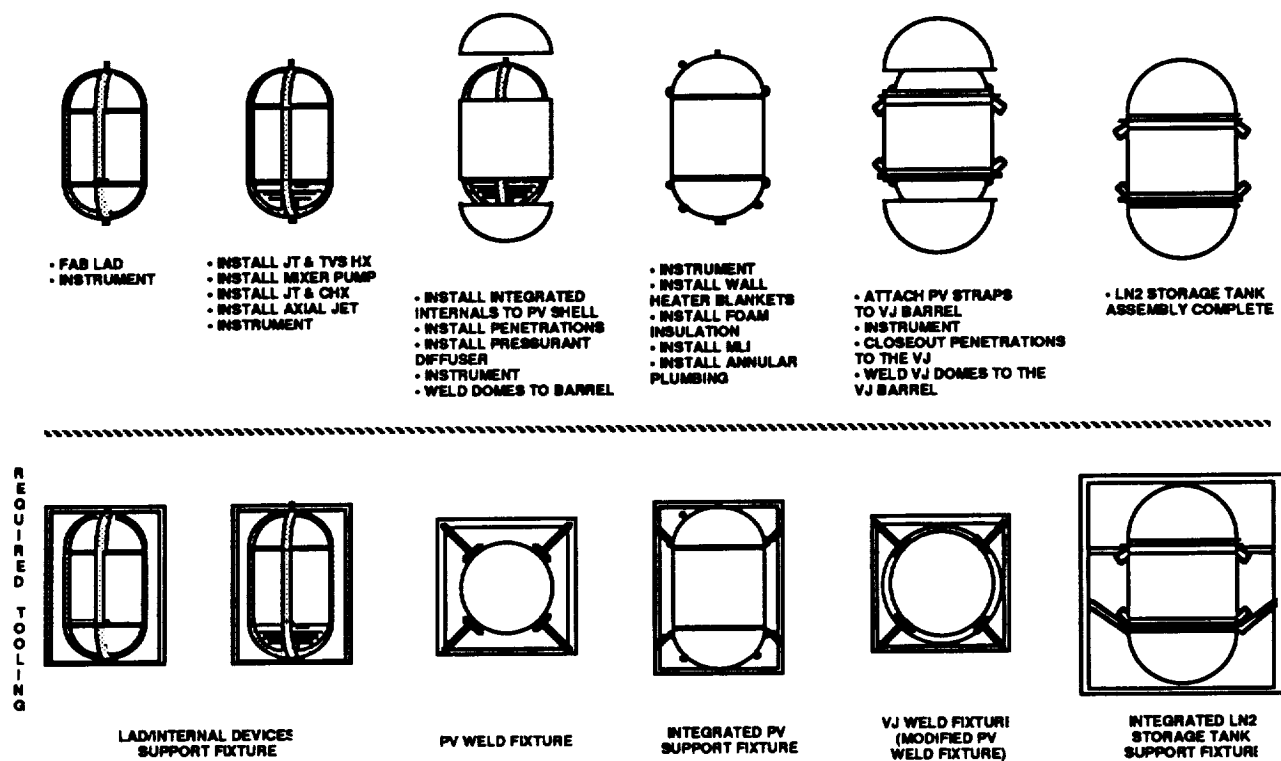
LN2 Storage Tank Assembly Sequencing and Supporting Tooling
